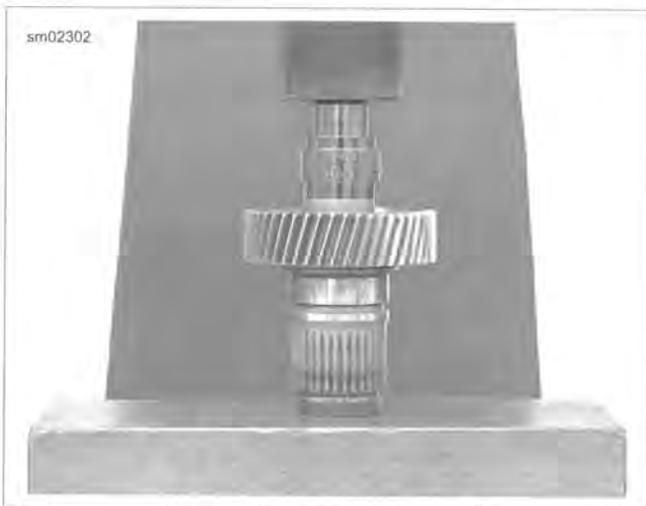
Installing Transmission Side Needle Bearing in Main Driver Gear
